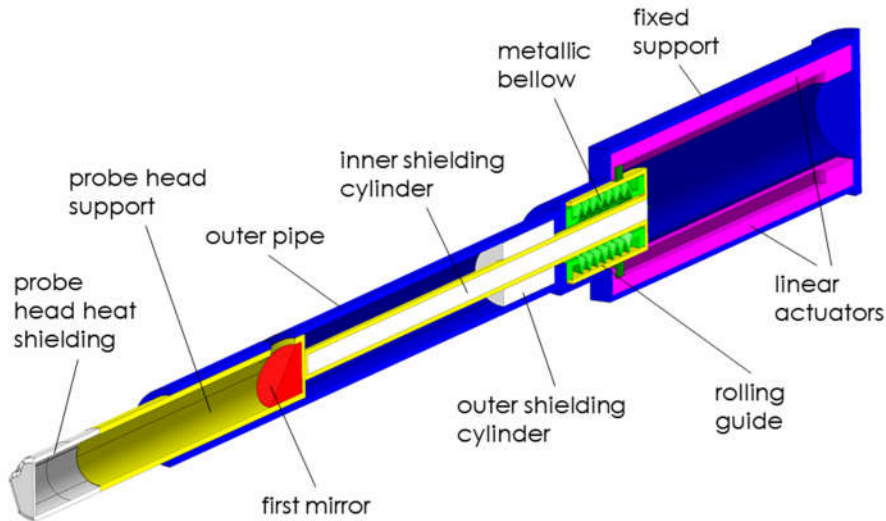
Different elements integrating the ITER FILD. The assembly formed by rolling guide-probe head support-probe head heat shielding has a length of around 2 m. The diameter of the probe head support is 108 mm. The radial gap between the probe head support and the outer pipe is 1 mm.
